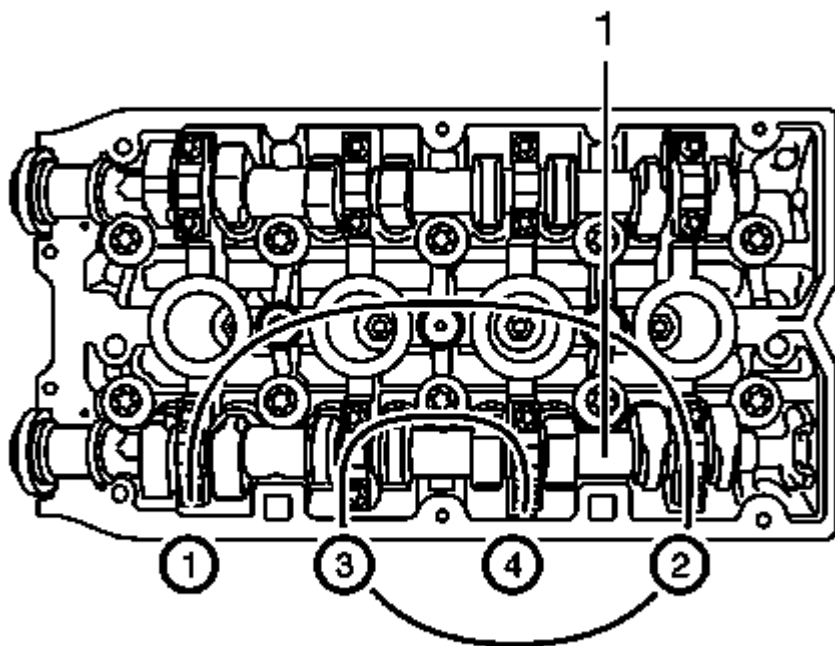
Exhaust Camshaft Bearing Cap Bolts Loosening Sequence
